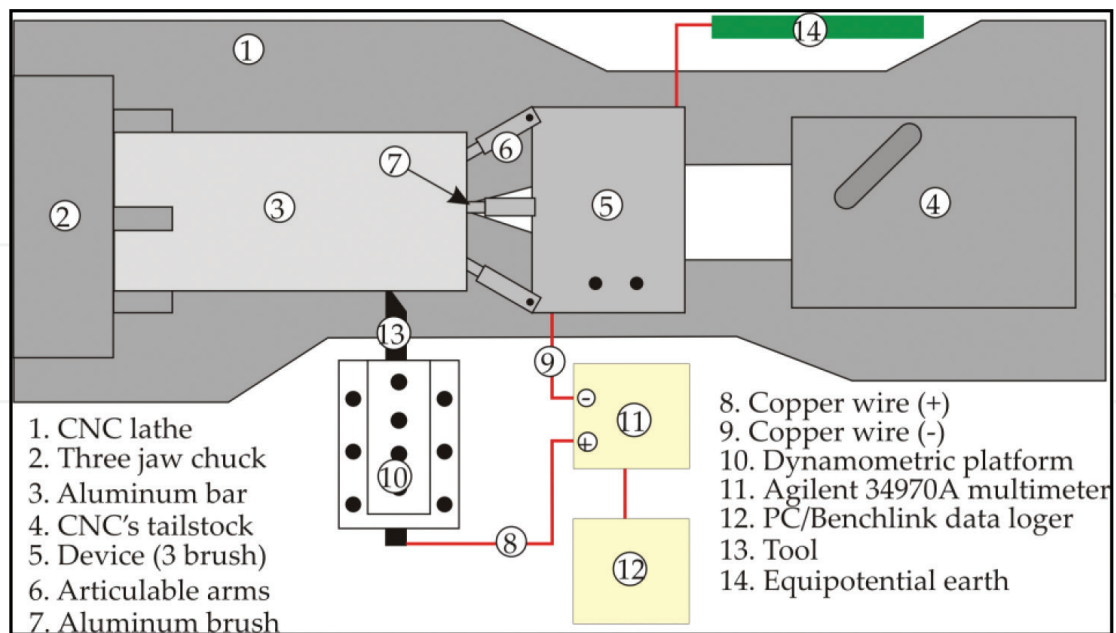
Schematic draw of the tool-workpiece thermocouple system.
